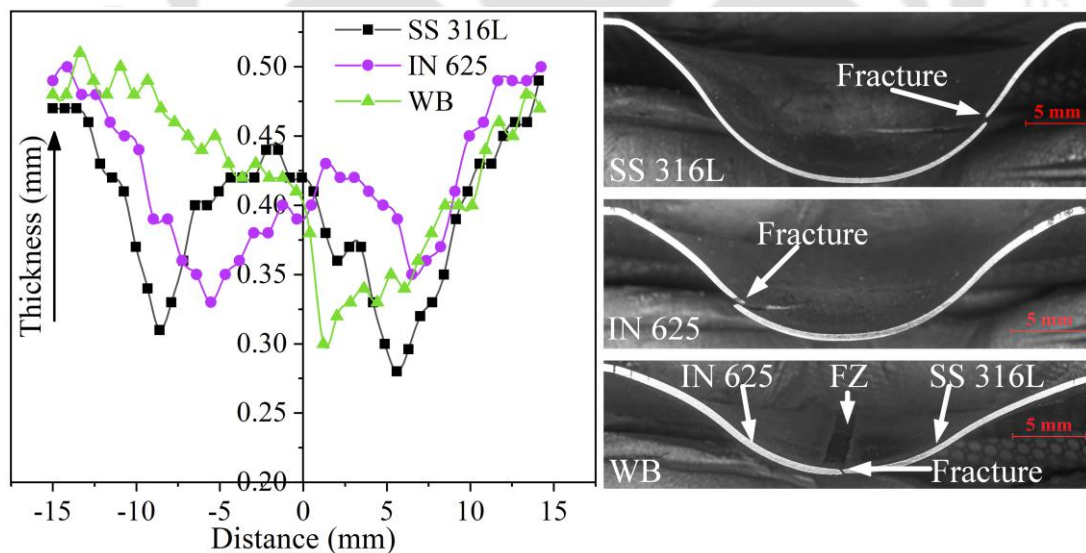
Thickness distribution and cross-sectional view of 316L stainless steel, Inconel 625 and welded blank for S1 specimen
